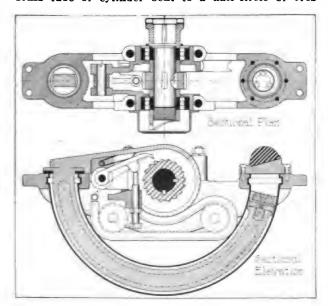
Detailed Construction of Crescent Air Crank, Illustrated by Cross Section Drawings,
